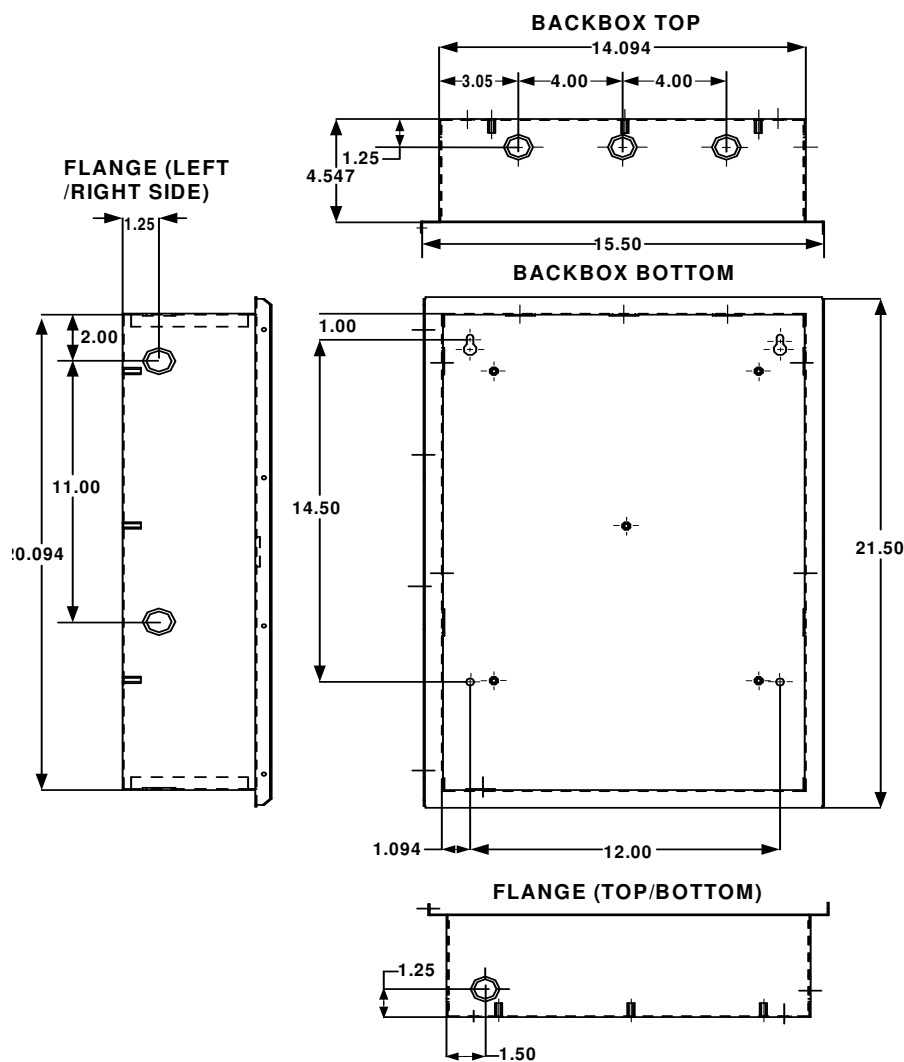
7100-Slim Backbox Dimensions
